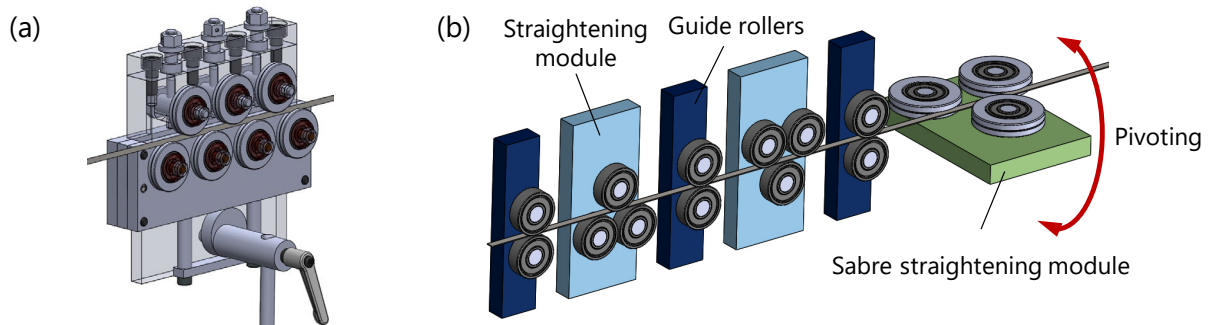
(a) (Sabre) straightening-machine with conventional design, (b) 3D straightening-machine with modular design.
